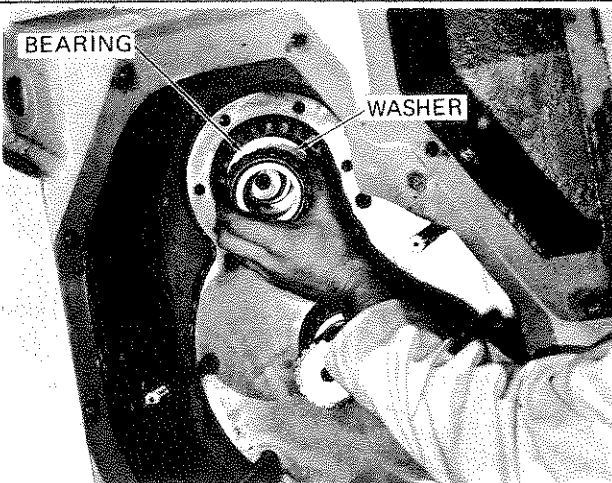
Reassembly And Installation Of Bevel Gear Shaft Assembly (Sheet 2 of 4)
